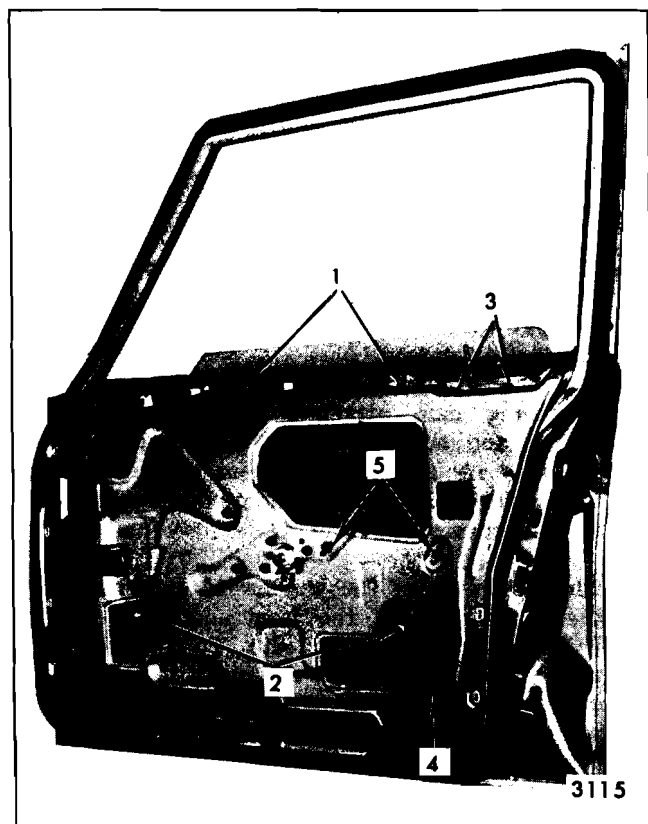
Window Removal and Adjustment - "B-69" Styles
